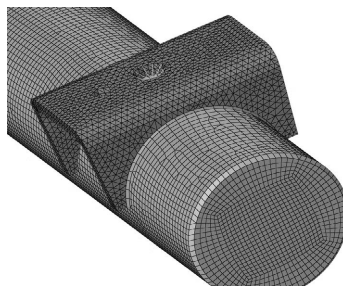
A quadrilateral element is used to simulate the weld between the axle housing and the plate spring seat
